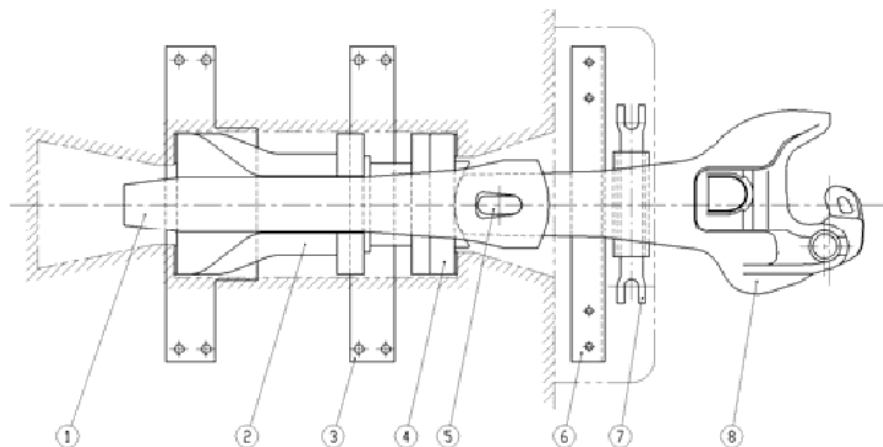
Coupling system assembly (Courtesy of Qing Wu, Central Queensland University, Centre for Railway Engineering, Rockhampton, Queensland, Australia, q.wu@cqu.edu.au). ①Yoke ②Draft gear ③Draft gear carrier ④Follower ⑤Yoke key ⑥Coupler carrier ⑦Coupler positioning device ⑧Coupler
